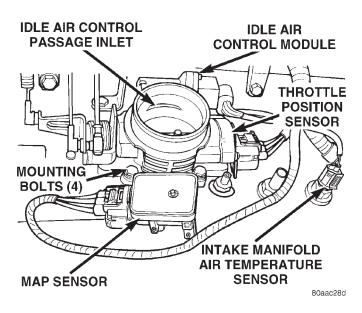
Throttle Body and Sensor Locations—4.0L Engine
